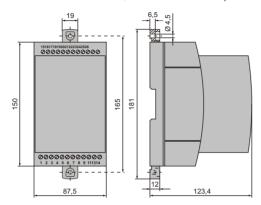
RISH Ducer M01 in housing T24, screw hole mounting brackets pulled out.
